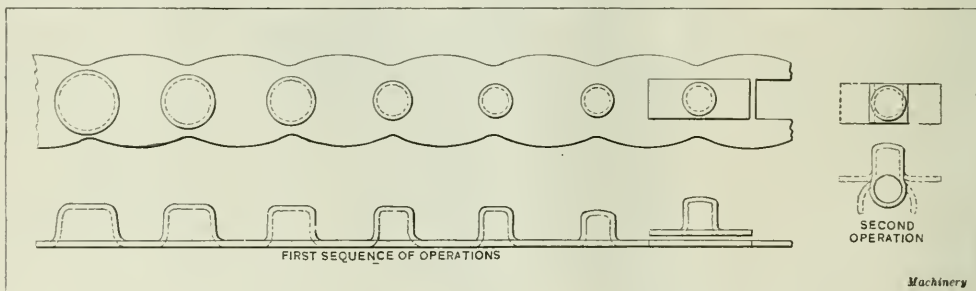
Sequence of Drawing and Blanking Operations performed in a Follow-die to produce a Cam Pin Blank
